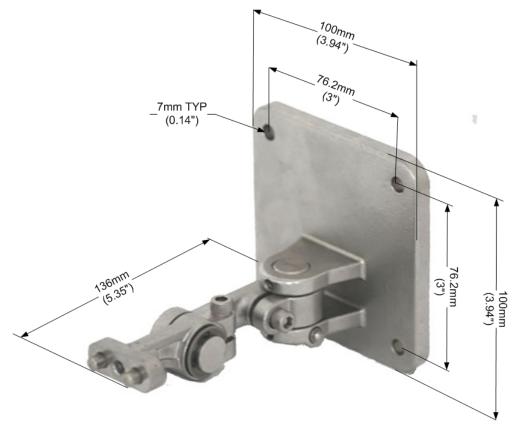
shows the Tilt Mount Assembly with dimension in both millimeters and inches.
